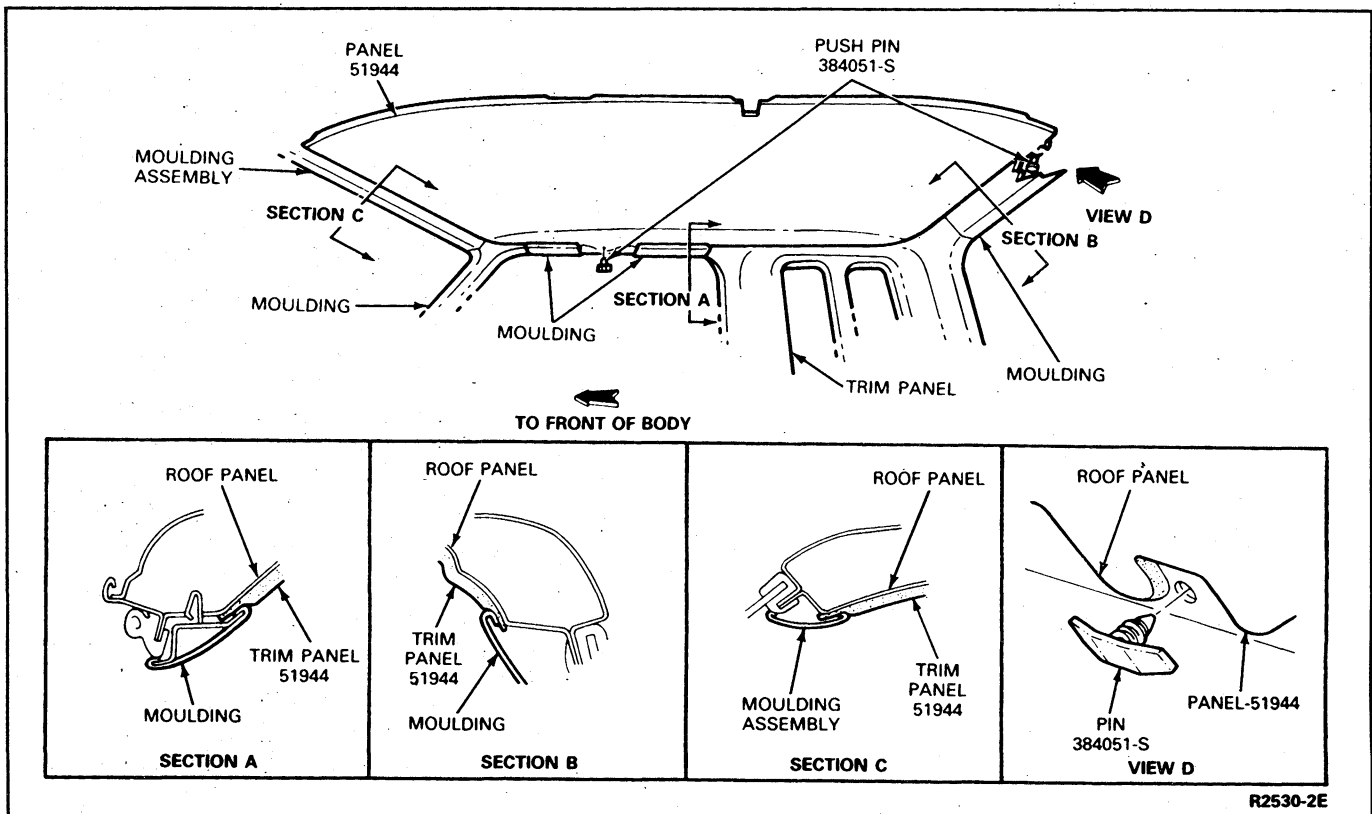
Roof Trim Panel Installation—F-150—F-350 Super Cab
